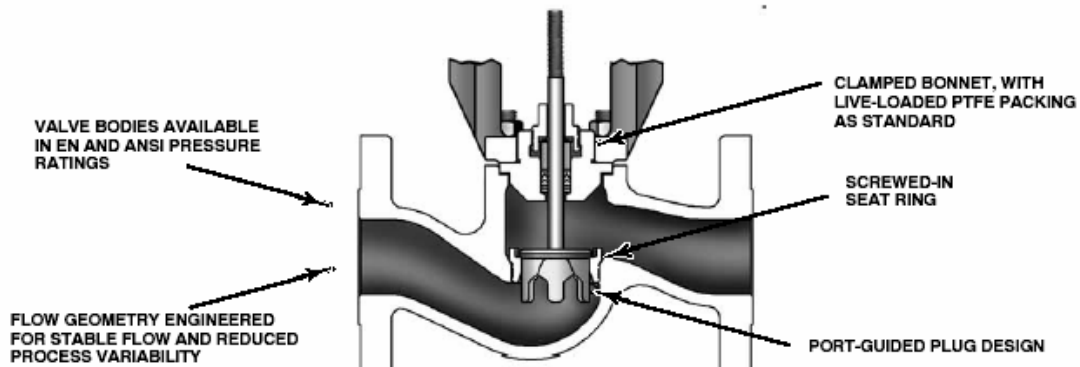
STControl Valve with Port-Guided Plug (Port Sizes of 36mm - 90mm)
